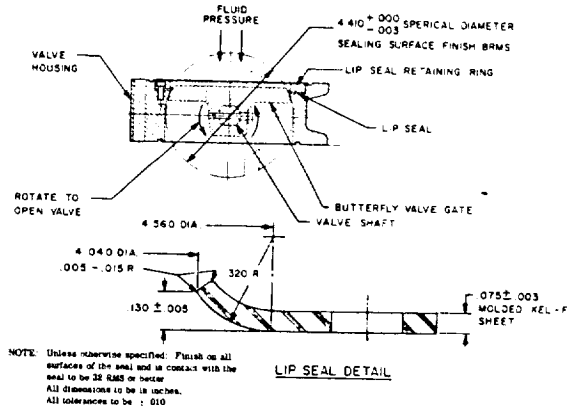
Typical valve seat lip-seal design for butterfly-type valves.
